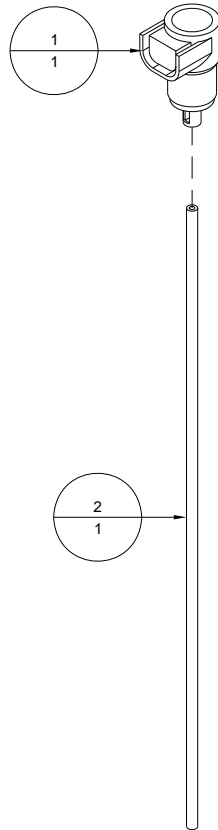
9101694A - Meniscus Vacuum Hose Assembly, 15'
